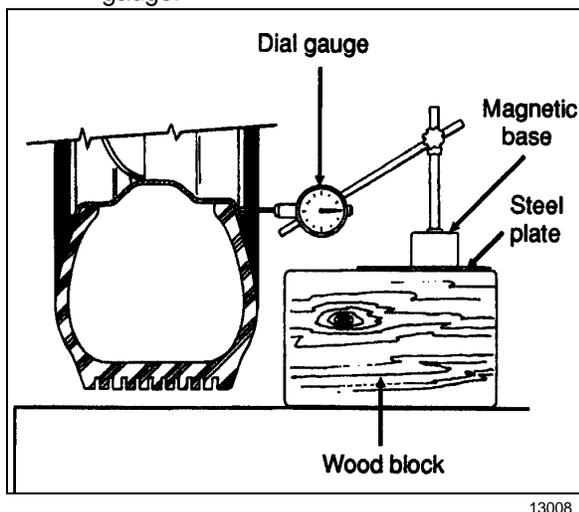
SUGGESTED DIAL GAUGE INSTALLATION
